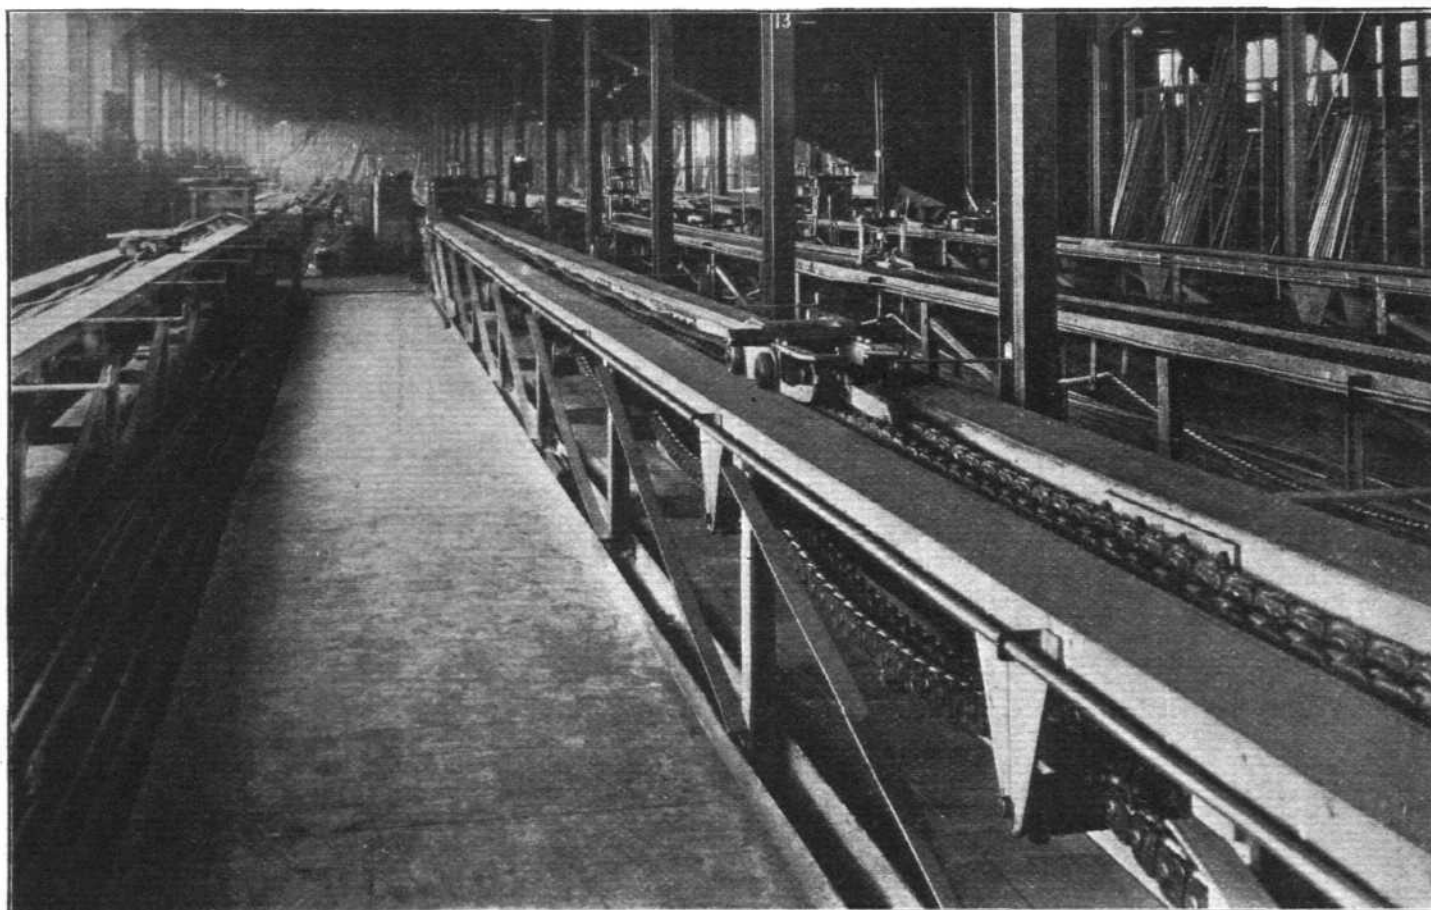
View of the four drawbenches in the Boulton & Paul Works.
